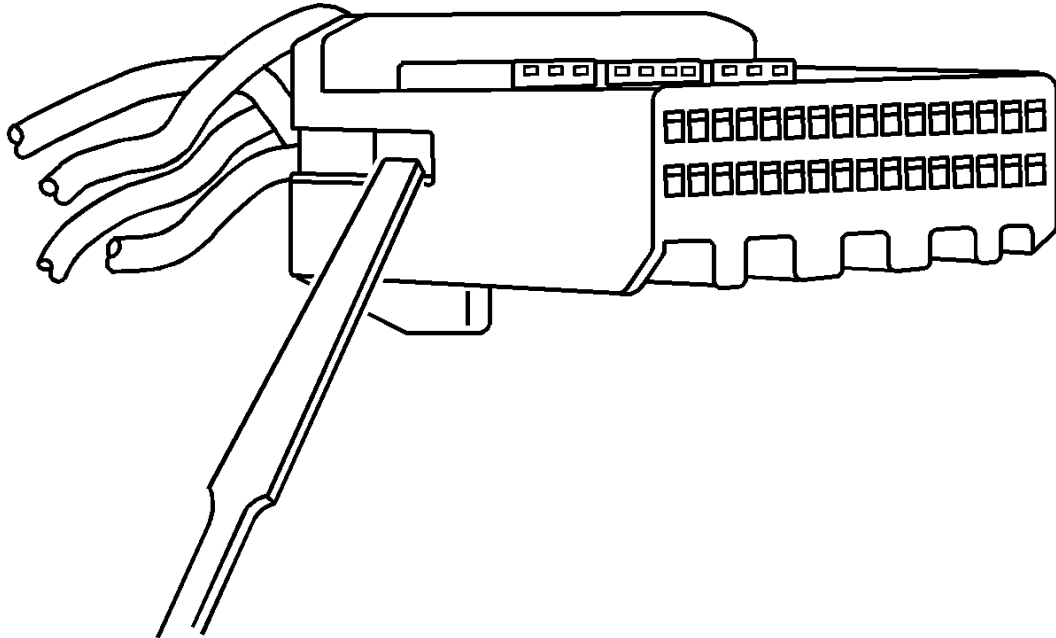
Releasing TPA Using Small Flat-Bladed Tool
